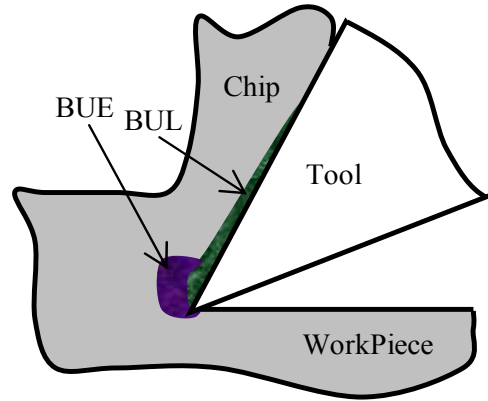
Schematic image of cutting tool with BUE and BUL [18]
